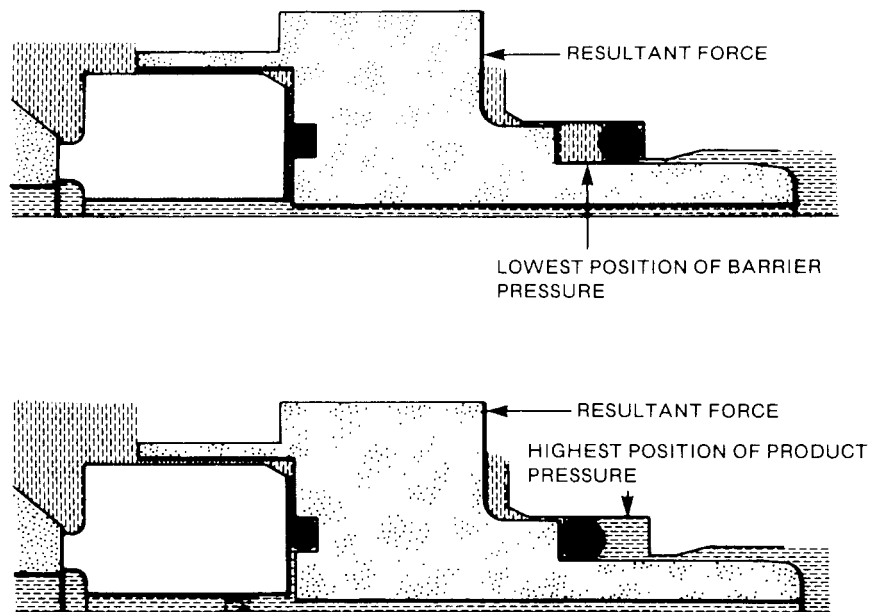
HYDRAULIC FORCES ON INNER SEAL OF DOUBLE SEAL WITH NEW CARBON SHAPE
